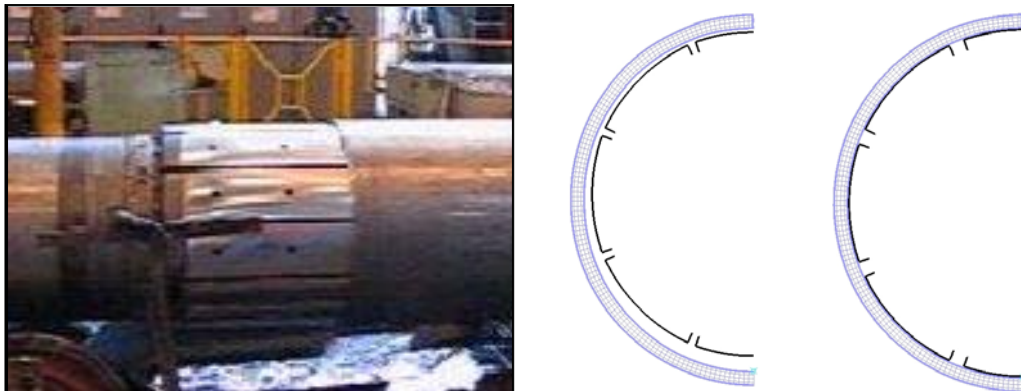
Mechanical expansion after welding: actual process and FE model
